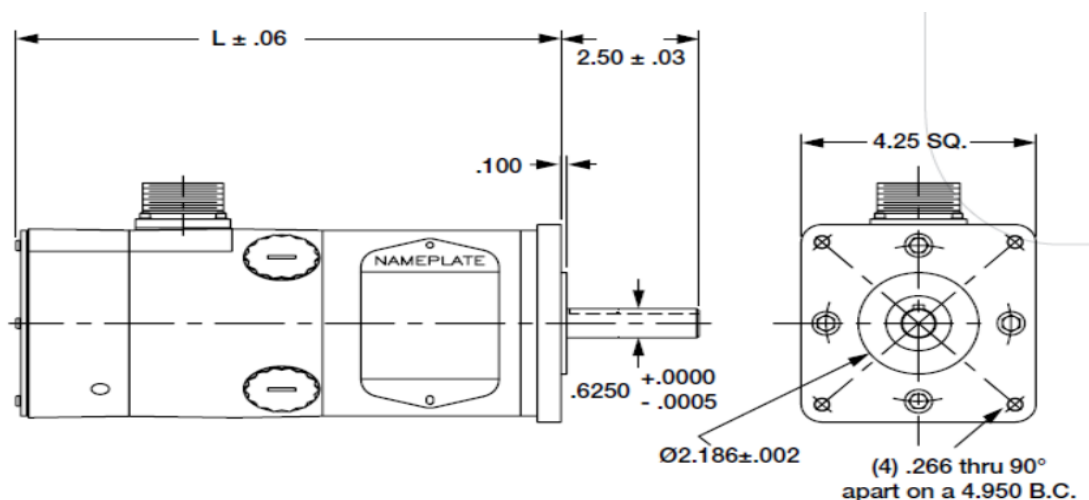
Dimensions of M4000 PMDC motor (all dimensions in inch)
